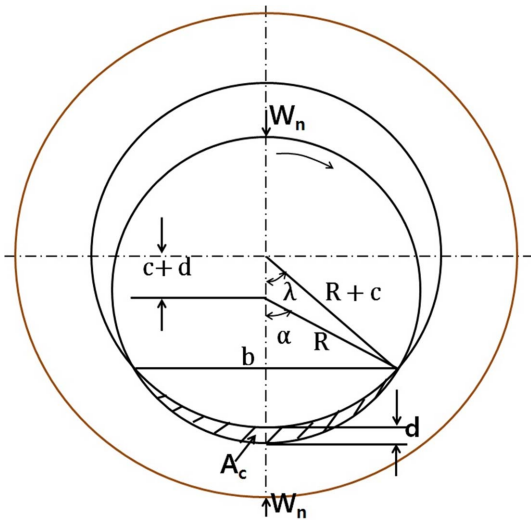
The schematic drawing indicating the removal of material by wear in a bushing of a journal bearing operating under conditions of stationary contact [30].
